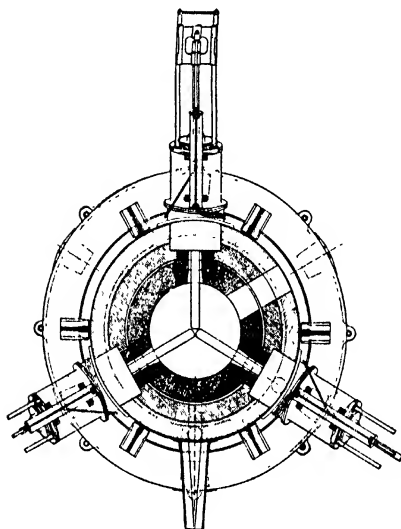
HORIZONTAL SECTION OF THE STASSANO FURNACE
